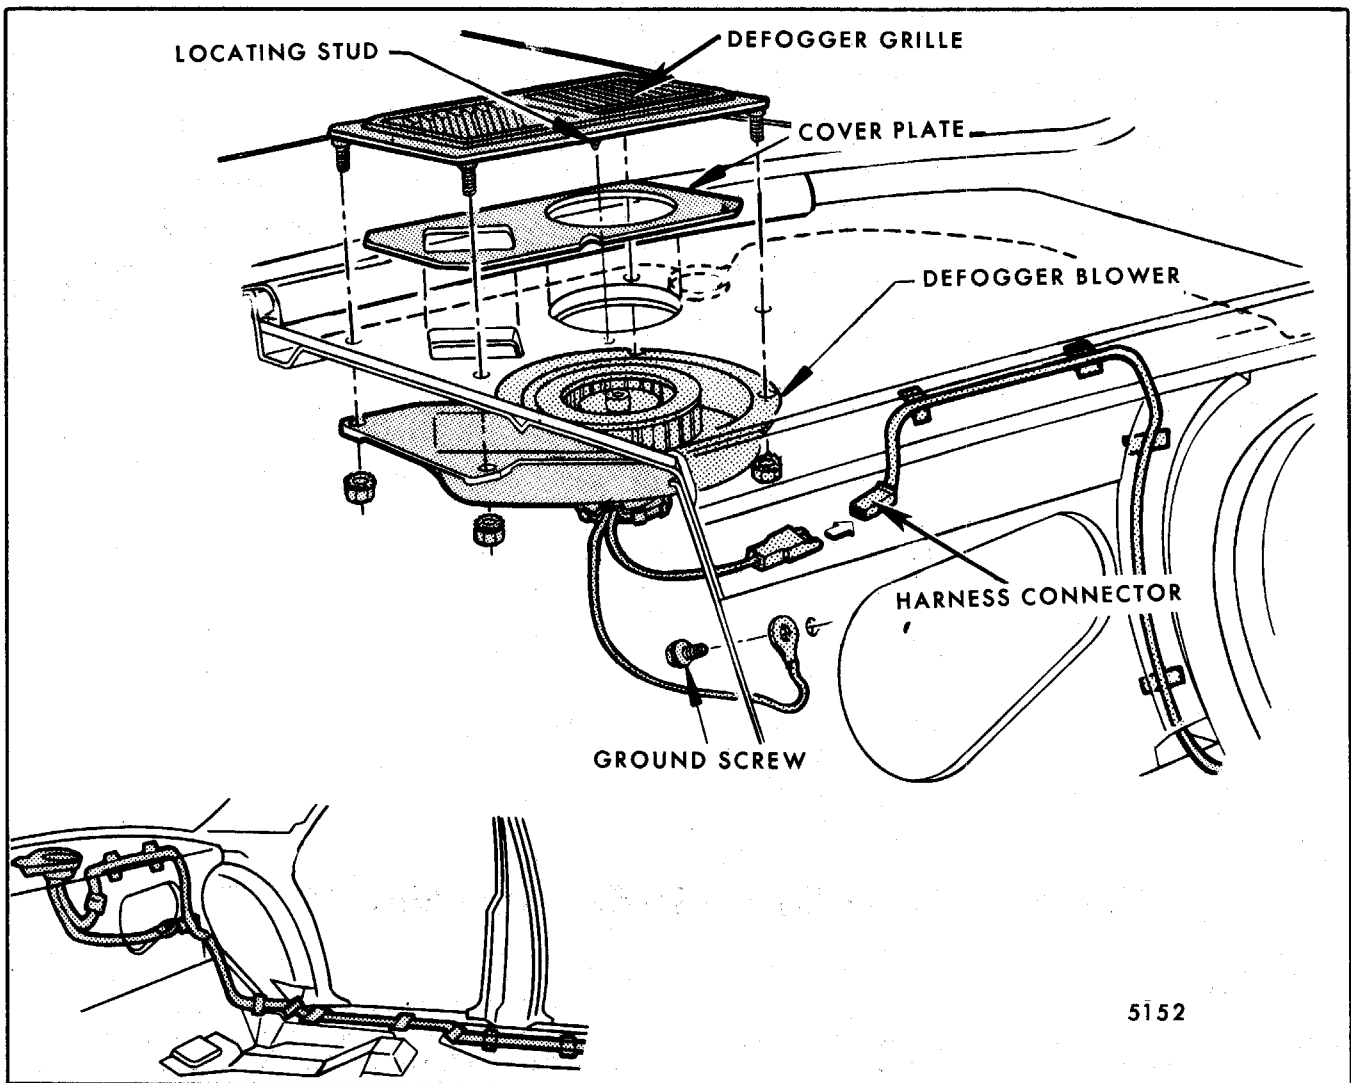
Typical Defogger Blower Installation - "B" Style Shown
